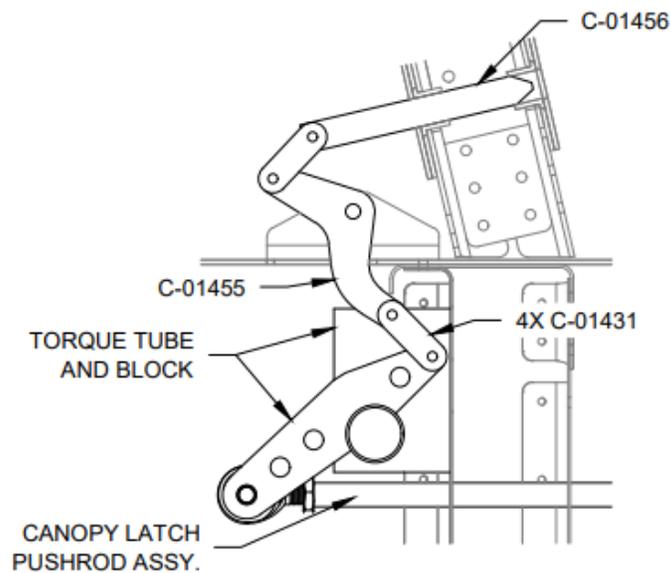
SECTION VIEW BELLCRANK ASSEMBLY
